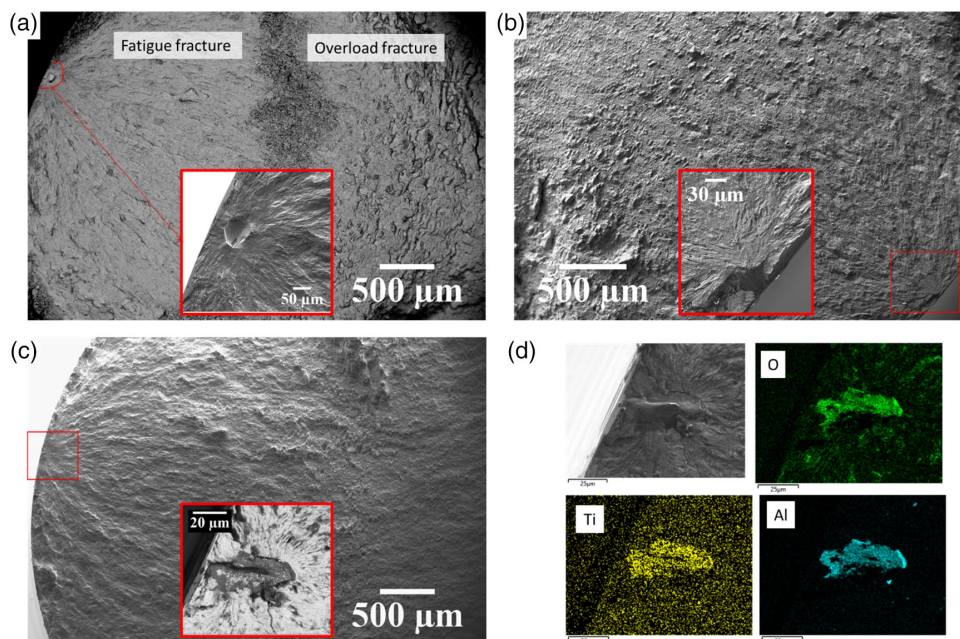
a) Fracture surface of DA VIGA (sample 12) showing crack initiation near the surface from a defect (probably gas pore), fatigue fracture and overload fracture regions, b) fracture surface of HSA IGA (sample 15) showing initiation of the fatigue crack on the surface, c) fracture surface of DA VIGA (sample 13) showing an oxide inclusion initiating the fatigue crack, and d) corresponding EDS elemental mapping of the oxide inclusion.
